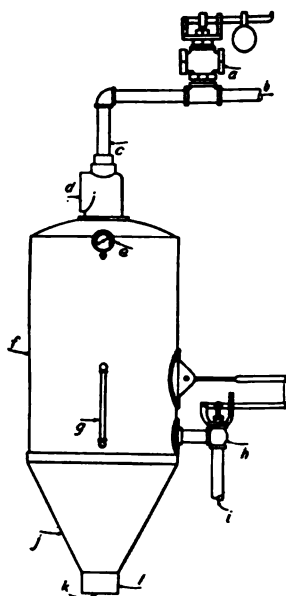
Trumble trap: a, safety valve; b, gas outlet; c, extra strong pipe; d, oil inlet; e, pressure gage; f, expanding chamber; g, gage glass; h, balanced float valve; i, oil outlet; j, settling chamber; k, waste discharge for sand and water; l, nipple welded to tank.
